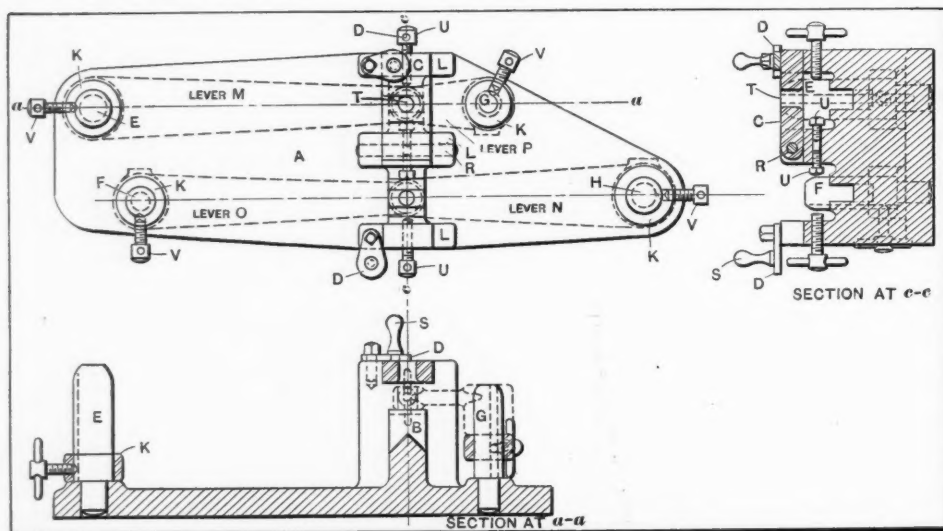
Plan and Section of Drill Jig for Levers in Fig. 1
